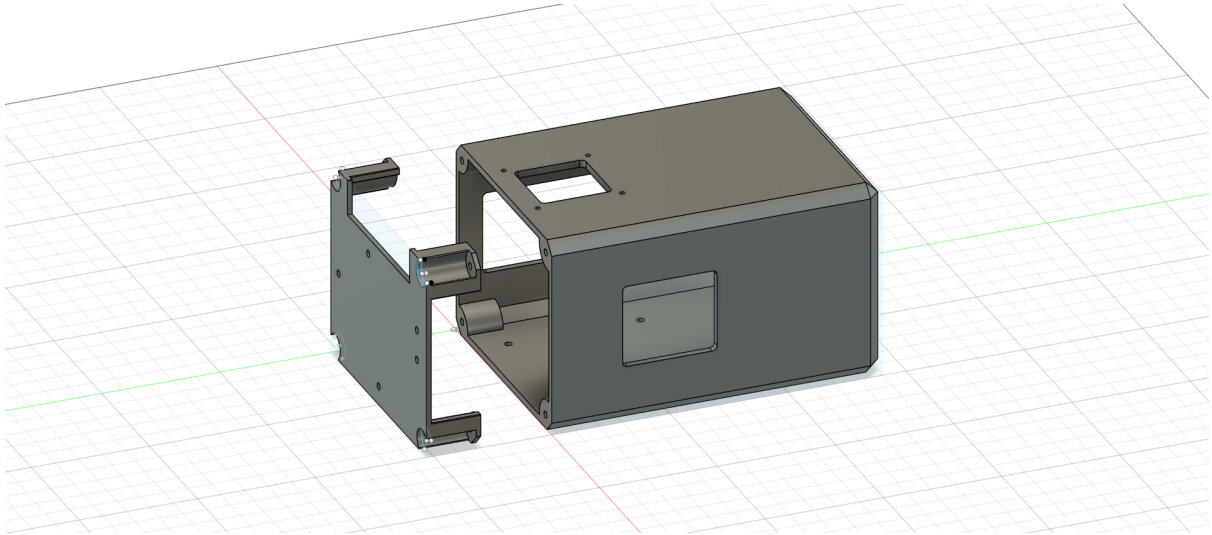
CAD Model of the Redesigned 3D-Printed Enclosure and Detachable Mounting Cover
